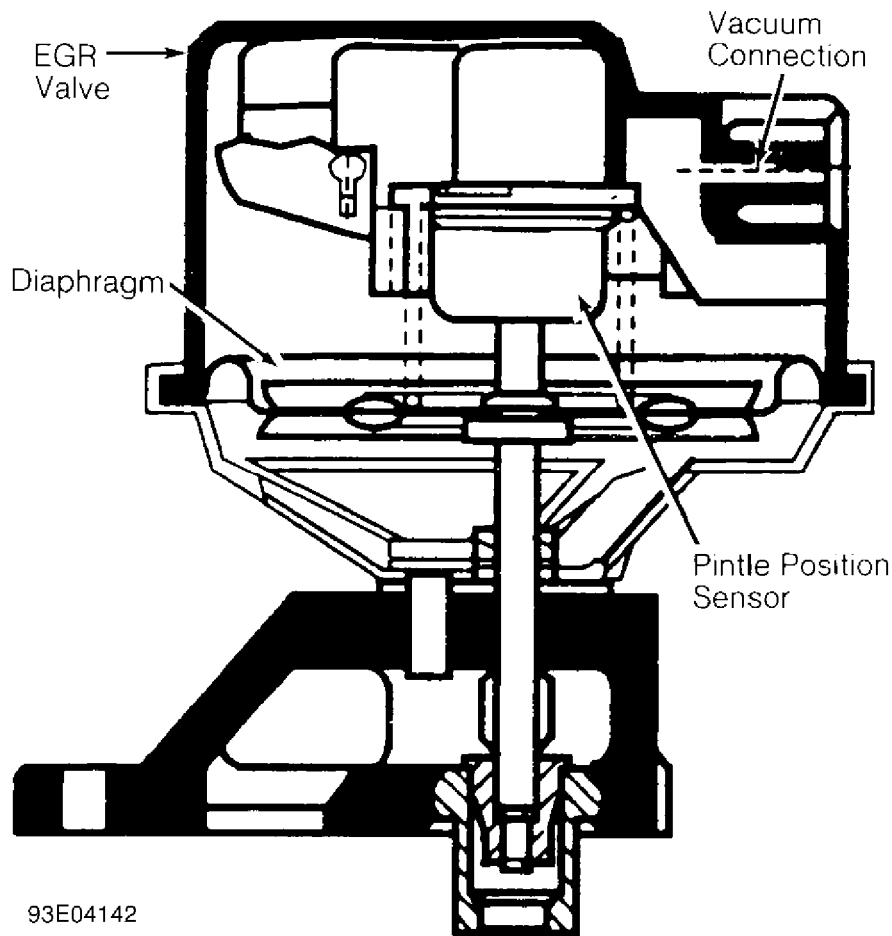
Cutaway View Of Typical Integrated Electronic EGR Valve
